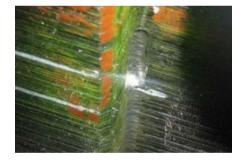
Typical crack excavation in the rotor rim slot beside the contact area
